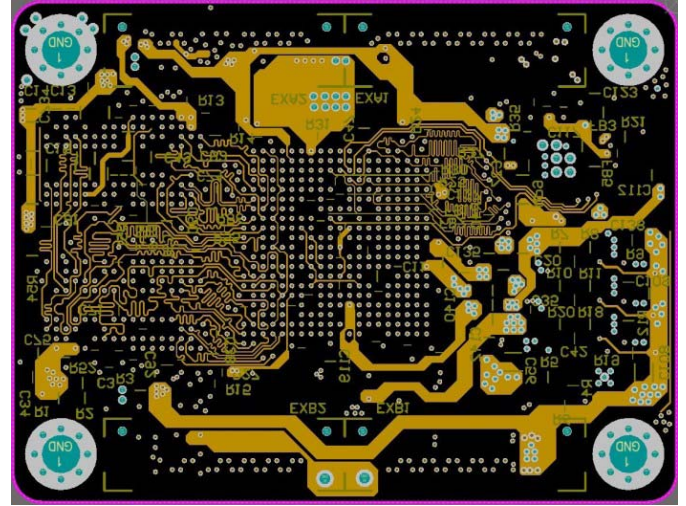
Layout of the RAIN1000Z2 PCB design. The left-middle area shows the PCB trace tuning for the length matching.
